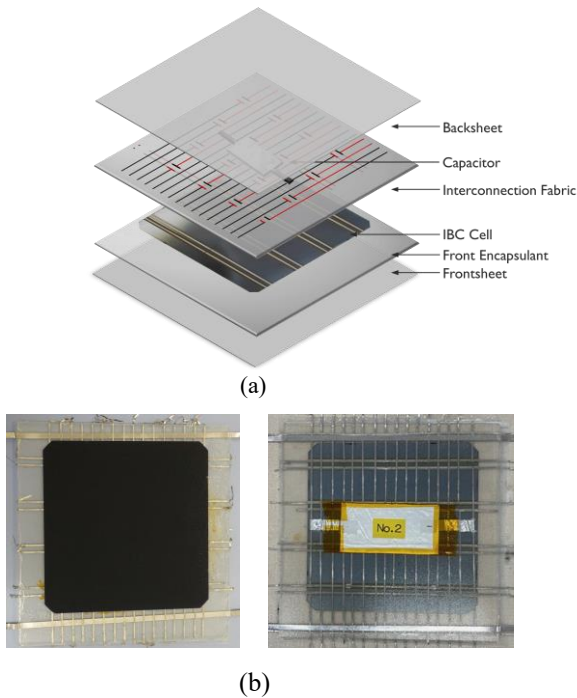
(a) Exploded view of the module layup; (b) Front and rear side of a one-cell laminate with zebra IBC cell and integrated capacitor.
